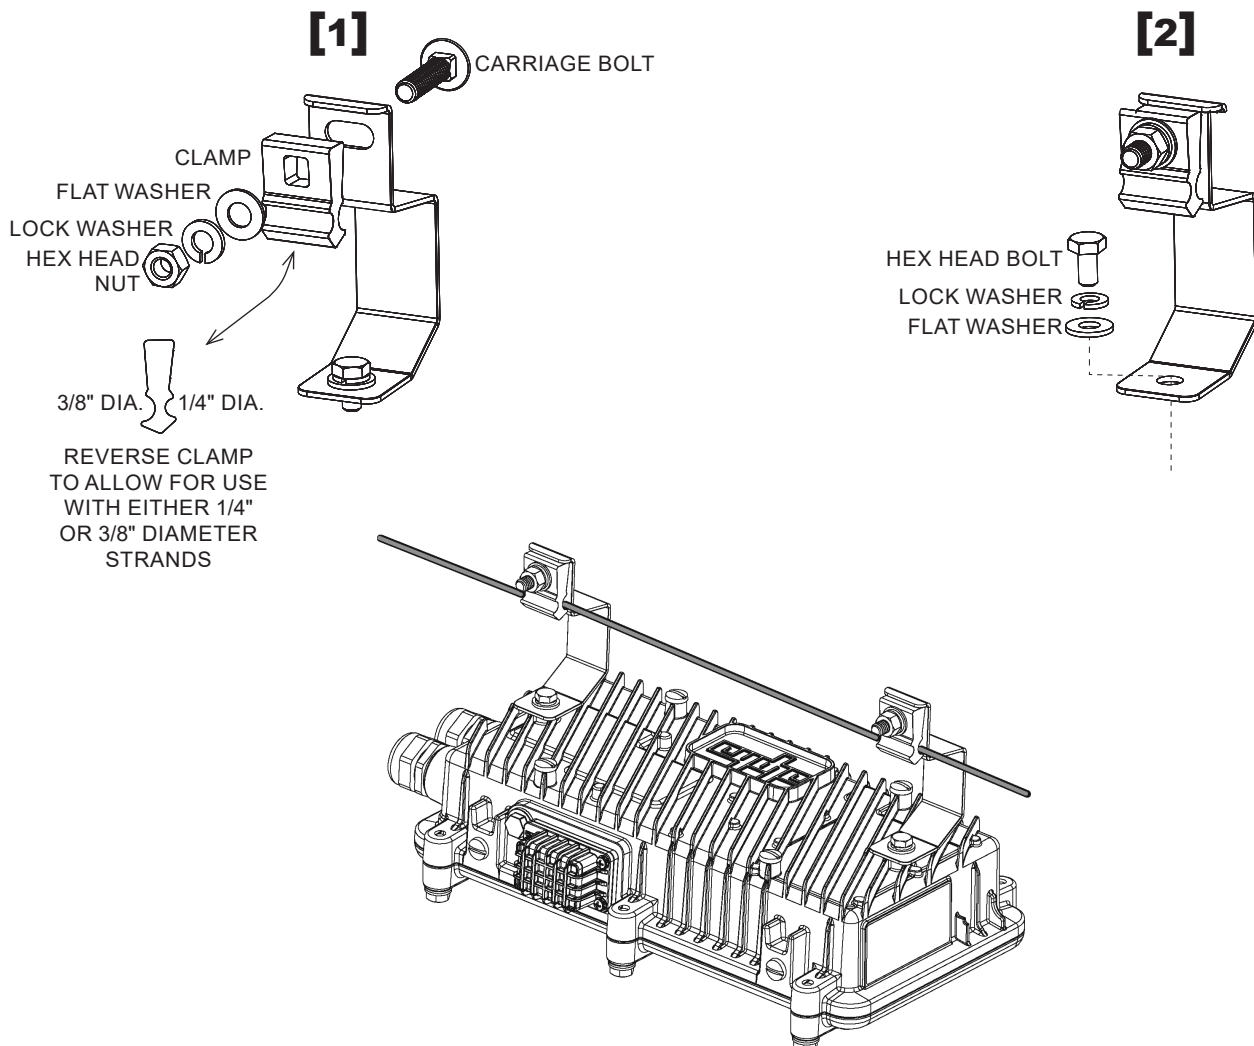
, Strand Mounting Bracket Installation, Horizontal Configuration
